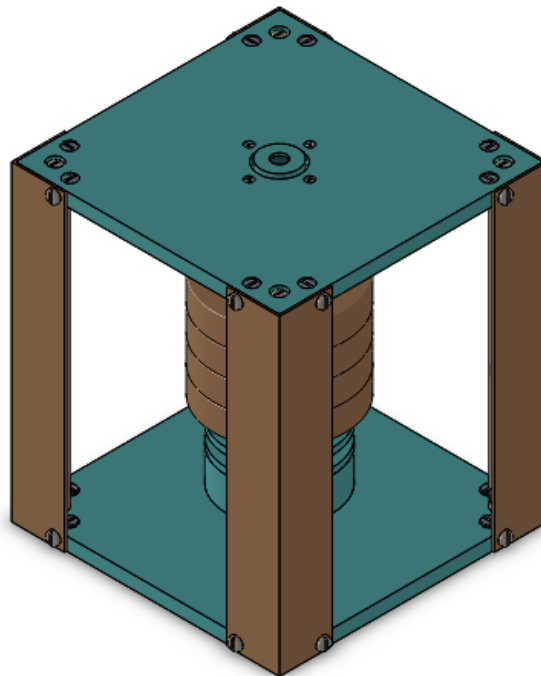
Reinforcing structure made with L-shaped profiles.
